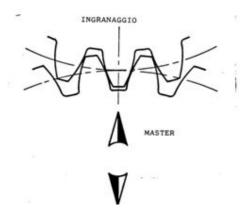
Operating principle of rolling gear tester at zero clearance
